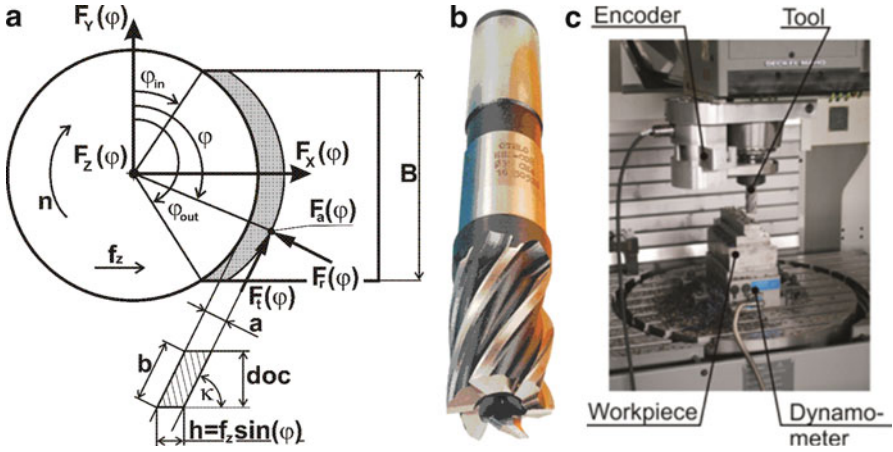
(a) Cutting forces in end milling, (b) Milling shank cutter DIN 845-B K-N HSS, (c) Photography of a workstation for the measurement of cutting forces on the milling machine DMU 60 monoblock
